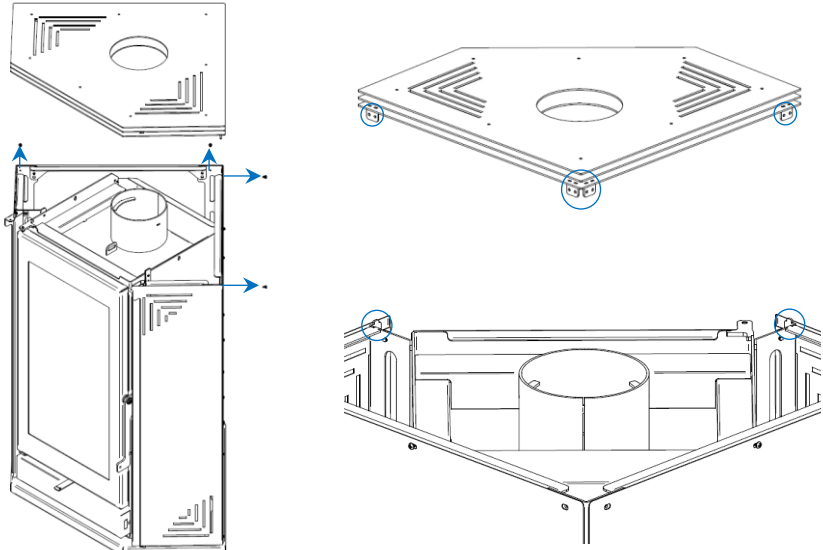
Removing the sheet metal top from the K4 Eco stove
